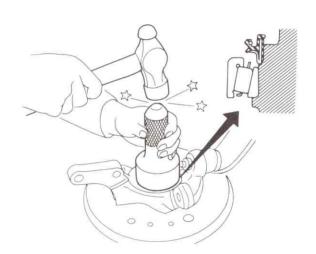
Installing the inner bearing (Note the inset which shows fitment of grease seal) (Sec 5)
